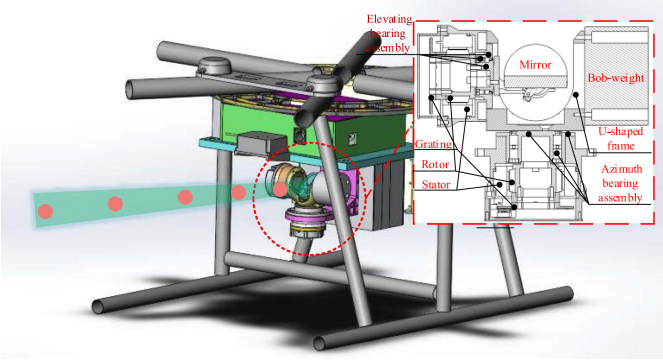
Three-dimensional simple model of prototype. The two-axis mirror is installed below the prototype to suppress jitter, which adopts the integrated design. The mirror assembly and the driving grating assembly are symmetrically arranged. A counterweight is installed on the other side of the U-shaped frame, so that the azimuth axis can achieve the balance. Total weight is about 1.5 kg (counterweight is about 0.4 kg).
